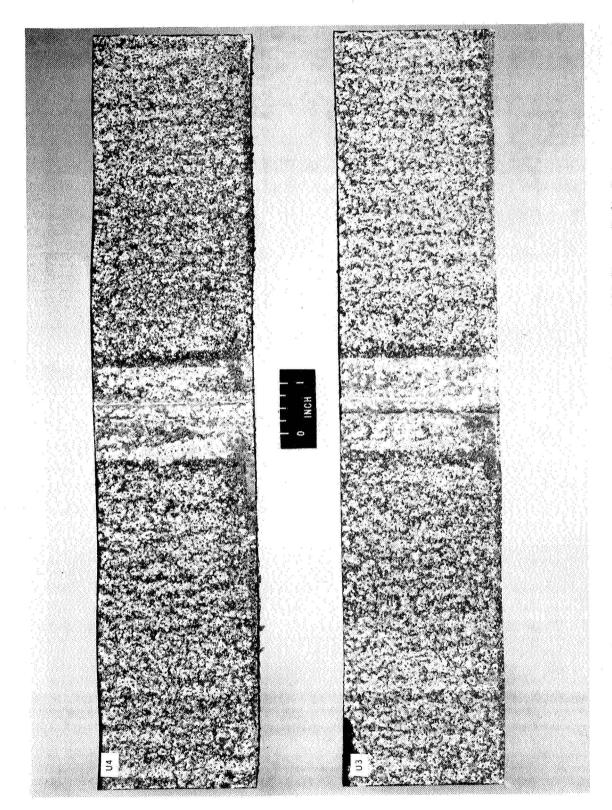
Conversion Coated Before Welding - 168 Hours Salt Spray
